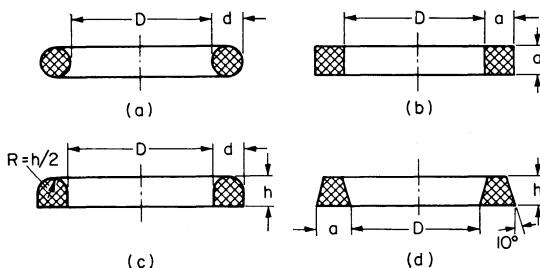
Dimensions of gaskets (Tables 3.18, 3.19)
